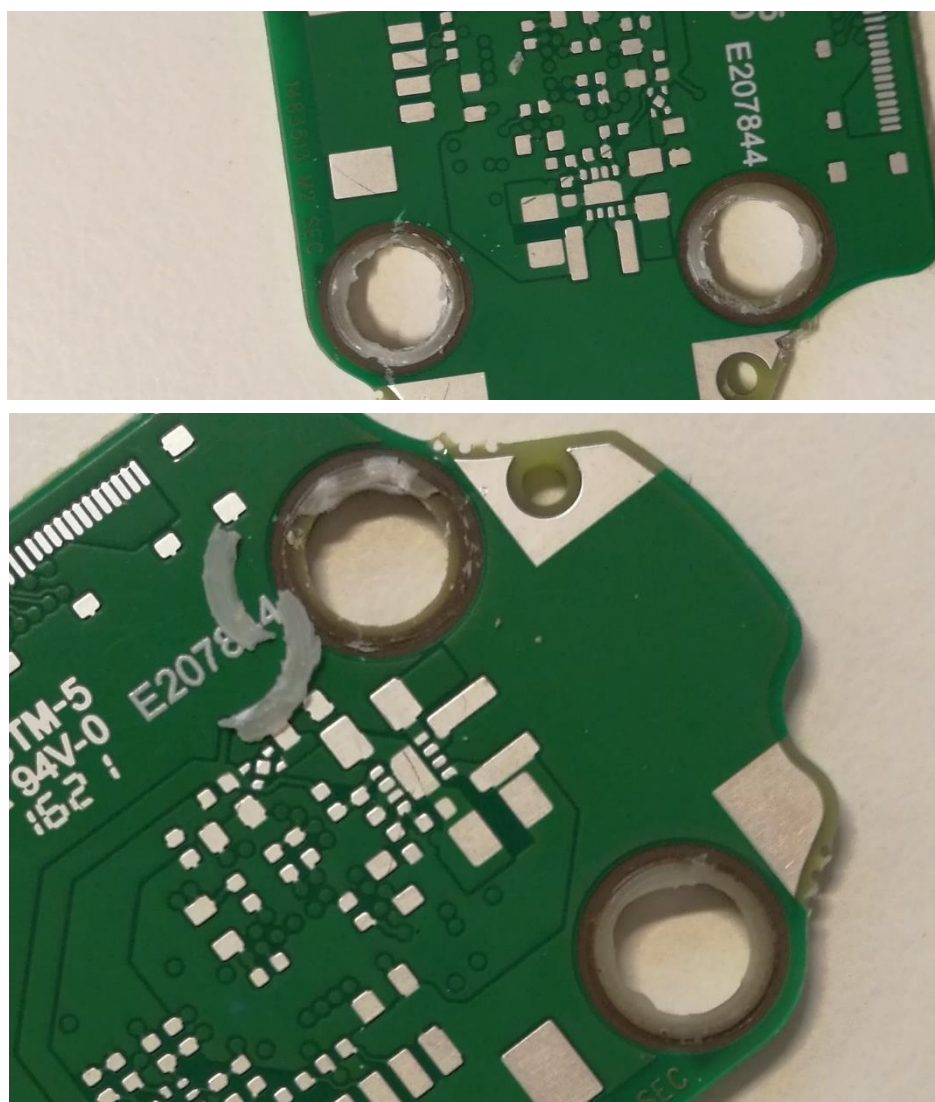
Images of INSERT and PCB RAW with a push-out force of 78,5 N. There is no wetting on parts of the PCB, while parts of the INSERT is not wet properly. This can be seen by the adhesive rests on the PCB where a thick, smooth film is present. The break is hence in the interface between the adhesive and parts and is considered an adhesion break. Adhesive: Dymax OP 67.
